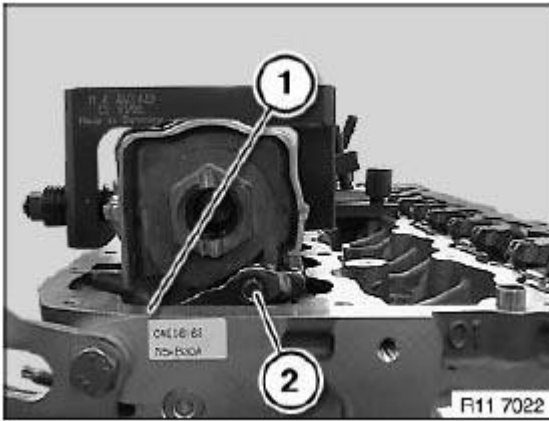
Identifying Intake Camshaft And Roller Cam Follower
